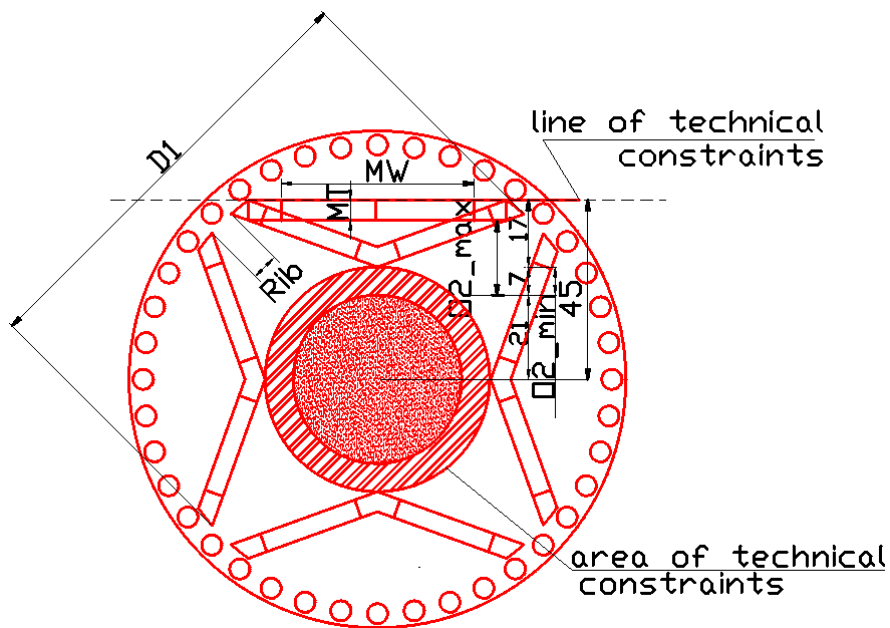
3 Rotor with V-type magnetic circuit structure under technical constraints imposed by manufacturer
